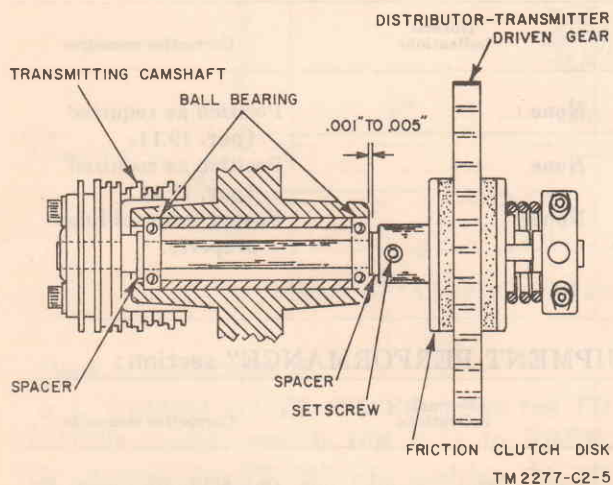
(Added) Transmitting camshaft end play adjustment.
